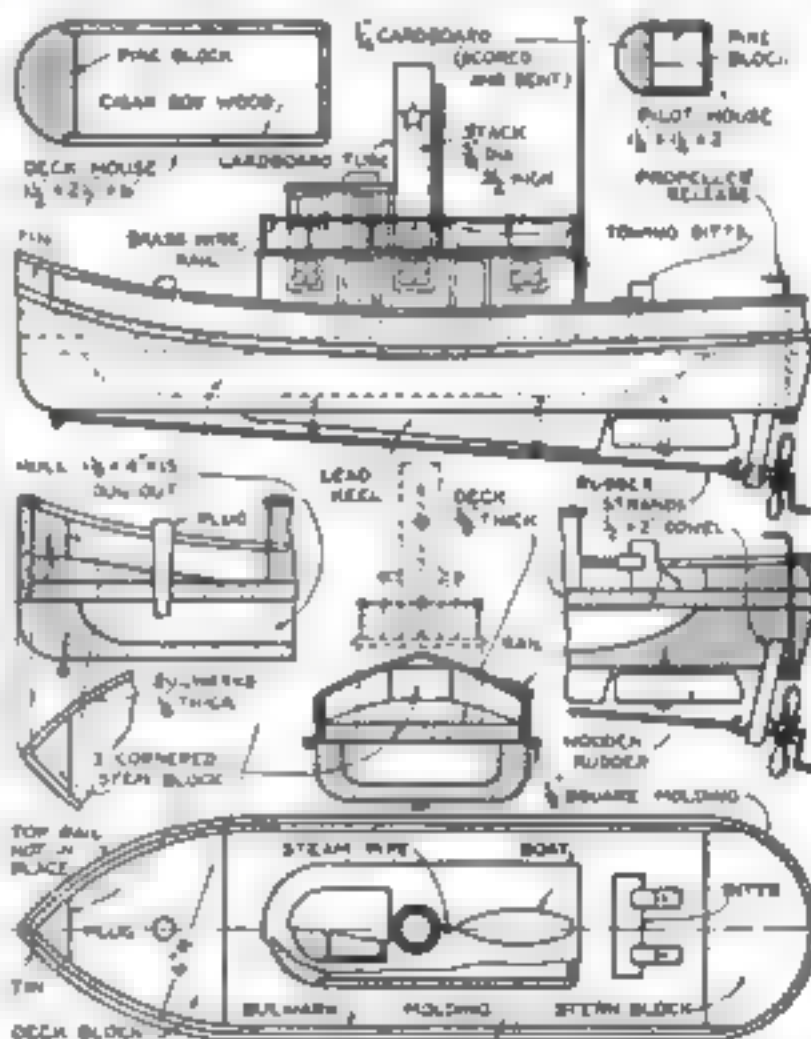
Side view and deck plan of the tugboat and sectional views which show how the hull members are shaped and assembled.
